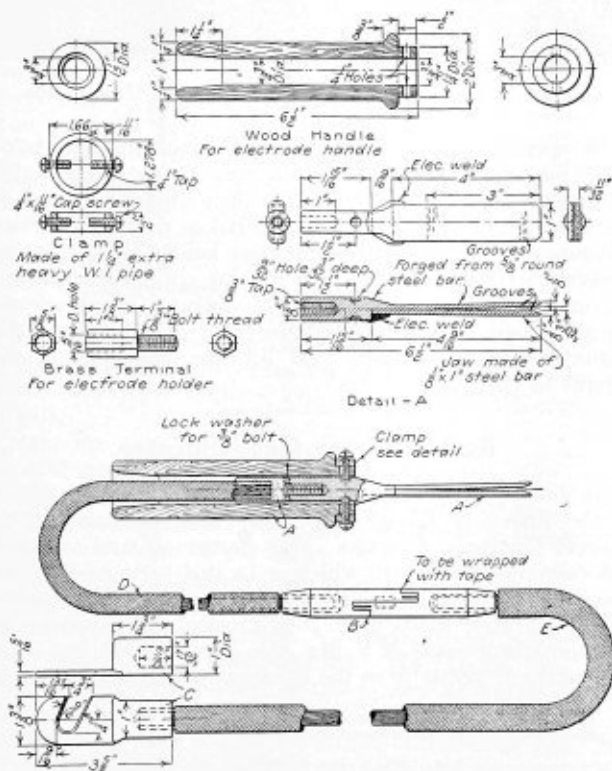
Electrode Holder and Cable for Use in Welding
